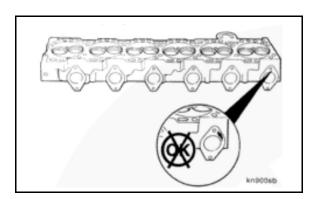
INSPECT THE EXHAUST MANIFOLD MOUNTING SURFACE
